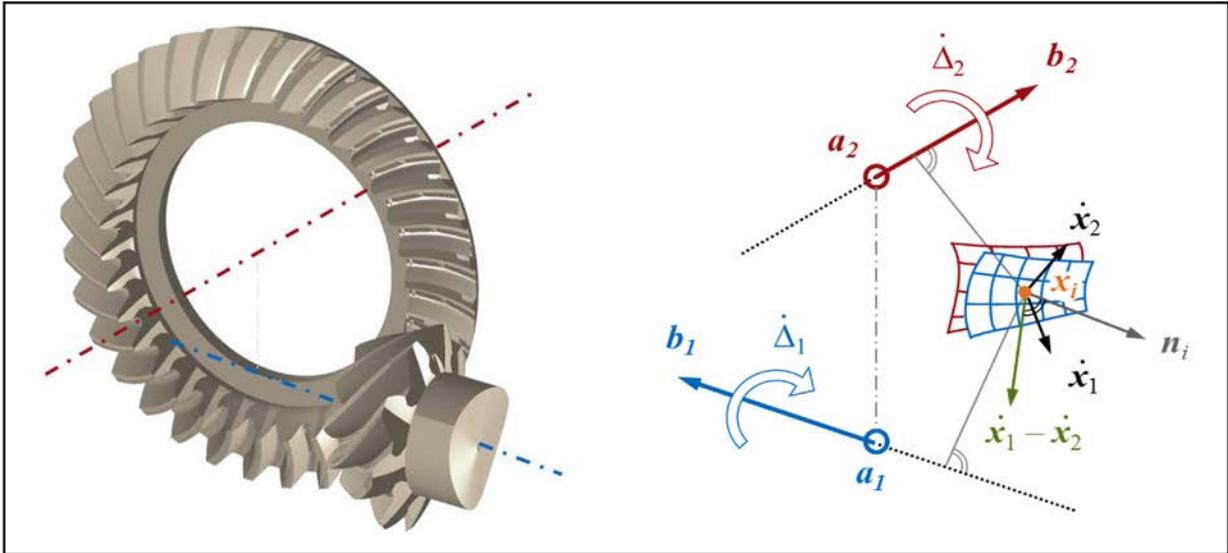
On the basic law of gear kinematics for gear-gear meshing.
